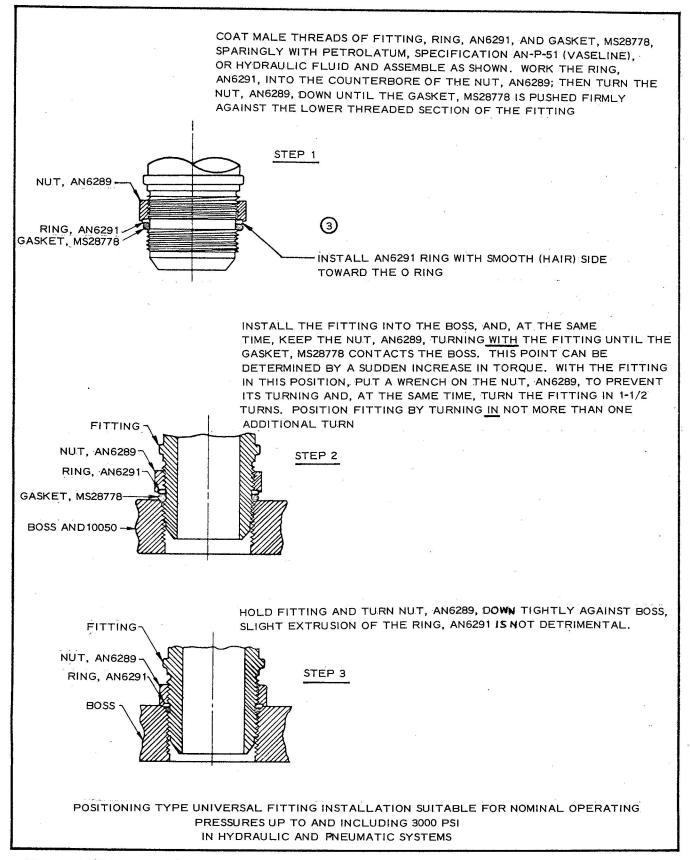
(Sheet 3 of 4) Fittings - Installation of Flared Tube, Straight Threaded Connectors
